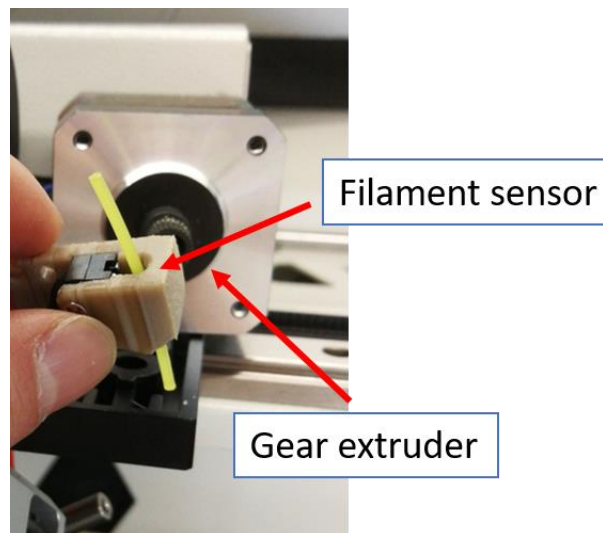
Disabled filament detector sensor to ensure the printer work properly with an oversized nozzle.
